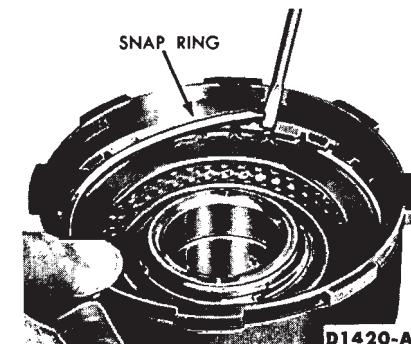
Removing or Installing Reverse—High Pressure Plate Snap Ring
